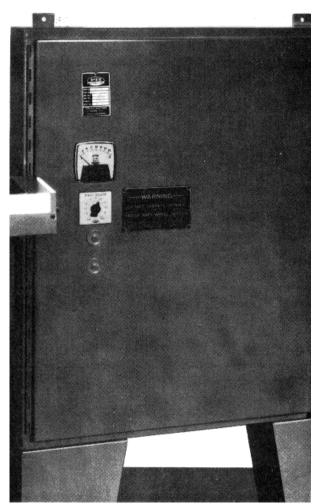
D. Wheel speed selected 1 knob on front of freestanding cabin
